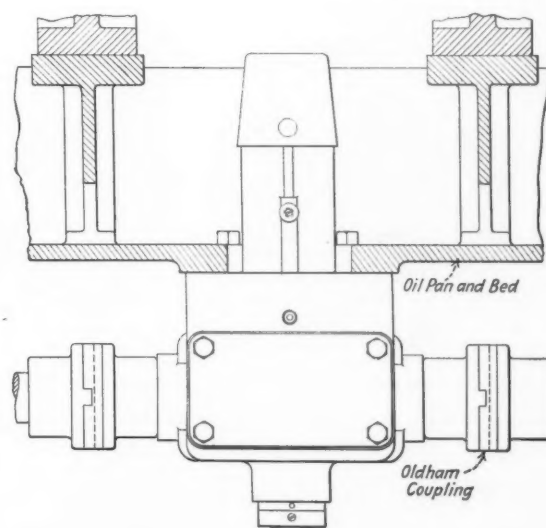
The Construction of the Bed or Chip Pan on the Foster Bolt Machine
